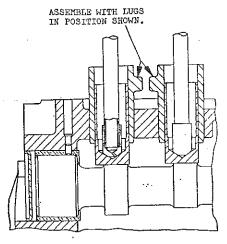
Valve lifter guides on 239, 257 and 286 engines
